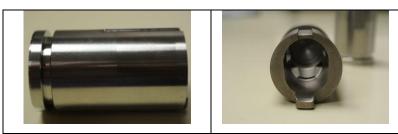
parking-position lock from an automatic transmission to be machined showing the two areas where turning, prototype No1 (right picture) and drilling prototype No2 (left picture) is done.
